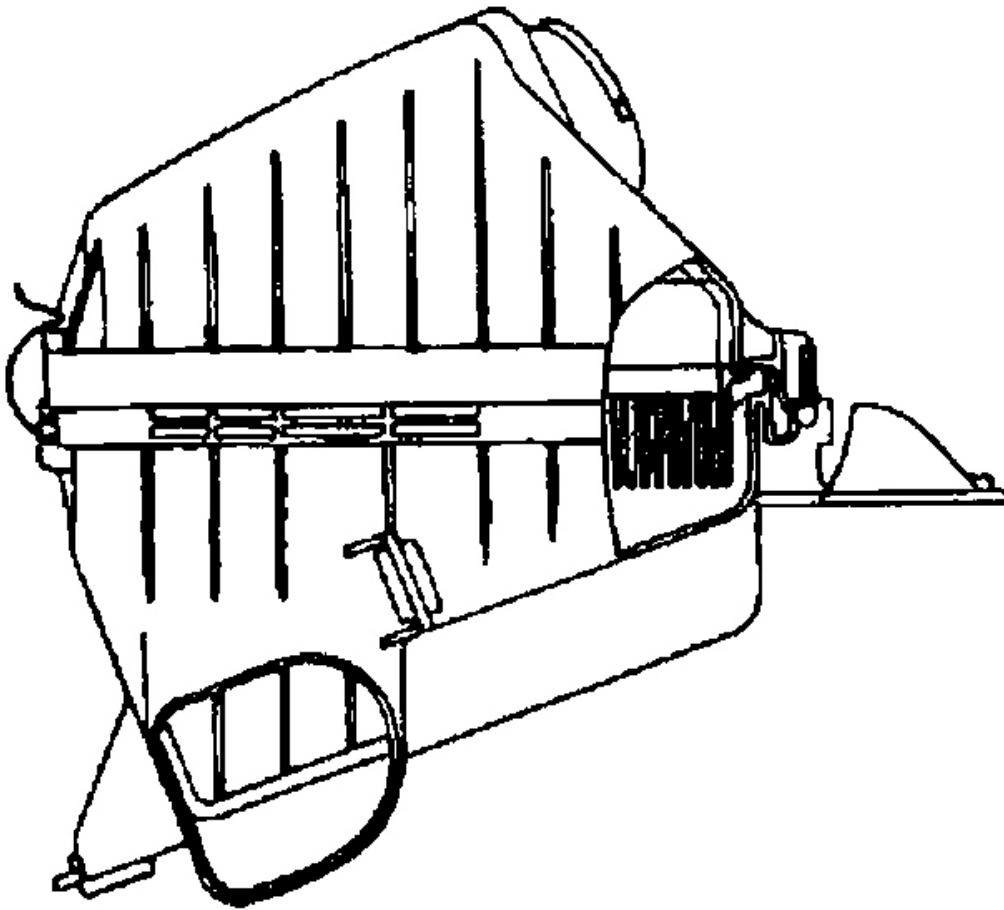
Removing Air Intake Hose & Air Duct Connected To Air Cleaner
